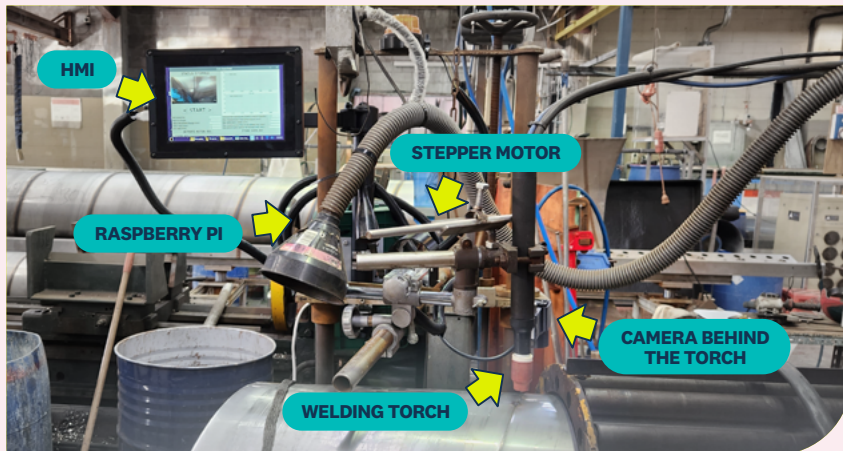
Retrofitting pipe welding system at Spiraweld Stainless Ltd
